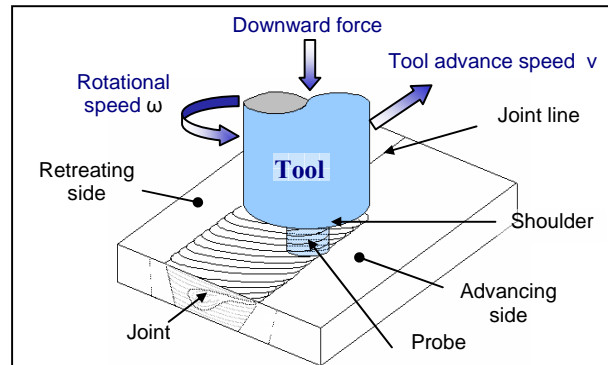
Illustration of the Friction Stir Welding phase
